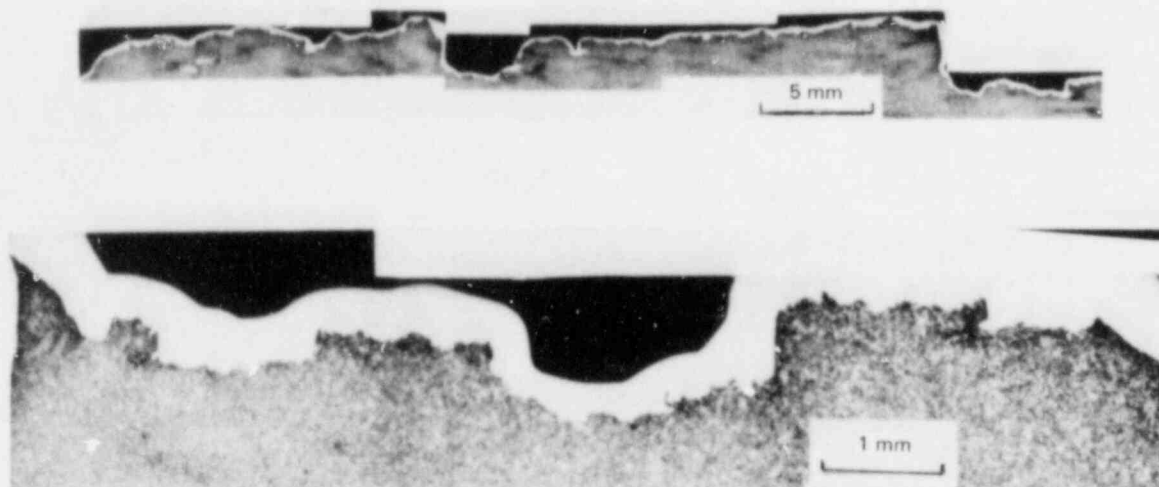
Fracture surface profiles comparing fracture surface irregularities in the cleavage-dominated region for a 6-cm-thick specimen (upper profile) and a CVN specimen (lower profile) of A 508 steel.
